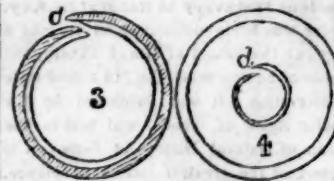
, represents an enlarged transverse section of a wrought iron tube, with an overlap joint D; and Fig. 4, a plan view of the mouth-piece before described.
